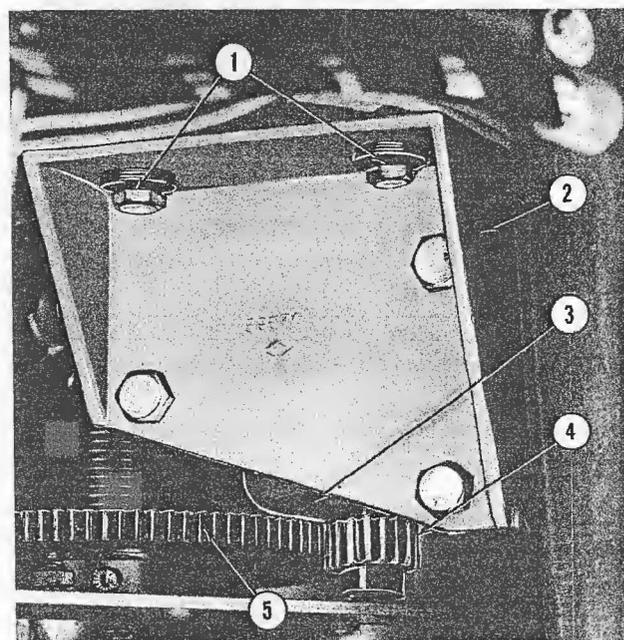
CHANGER MOTOR PINION AND SELECTOR GEAR ADJUSTMENT
